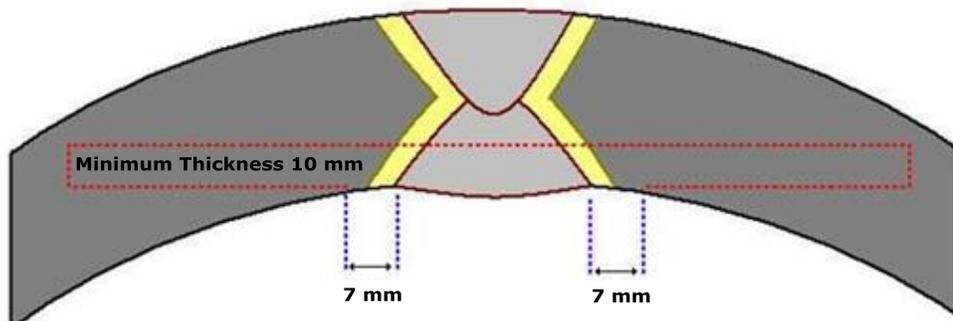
SSCC corrosion test specimen removal for DSAW linepipe weld seam. Weld toe shall be preserved from machining to evaluate HAZ transition.
